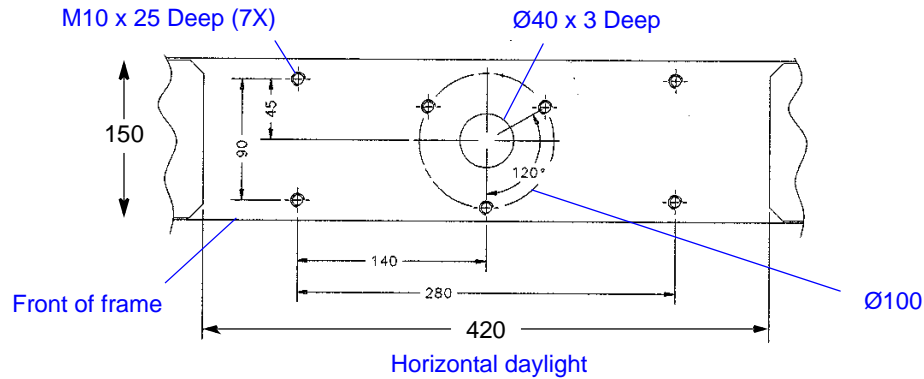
Series 5567 and 5569 Standard Configuration - Base Beam Mounting Dimensions
